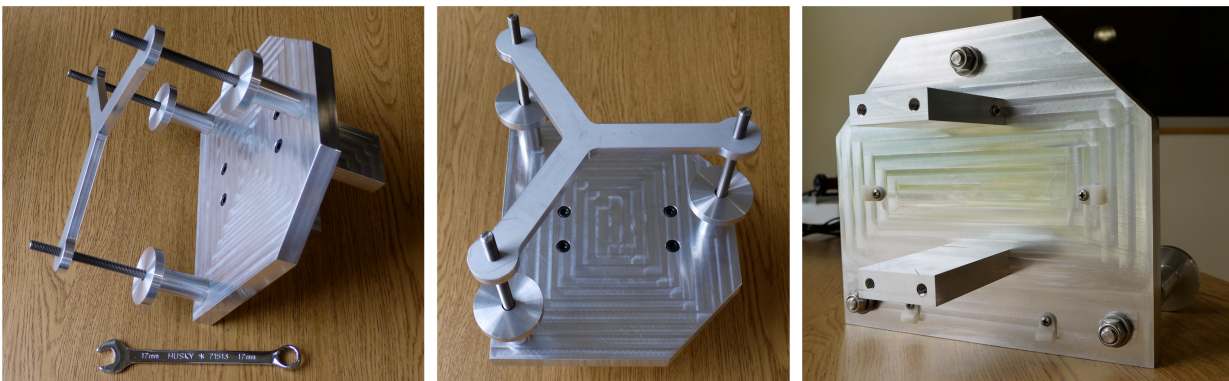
Aluminum adapter plate assembly. Left and center – views of plate assembly with 3 aluminum spacers on M10 bolts. The Y-plate is threaded to accept the M10 bolts (max torque 12 ft-lbs). Note that this Y-plate goes above the base plate of the structure when the telescope is in the stow position (looking toward horizon). Right – view bottom of adapter plate assembly without SBIG camera.
